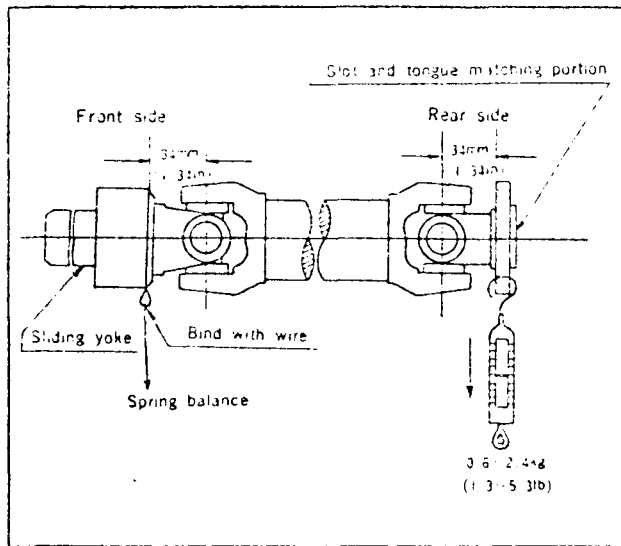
Checking of Propeller Shaft Swinging Torque
